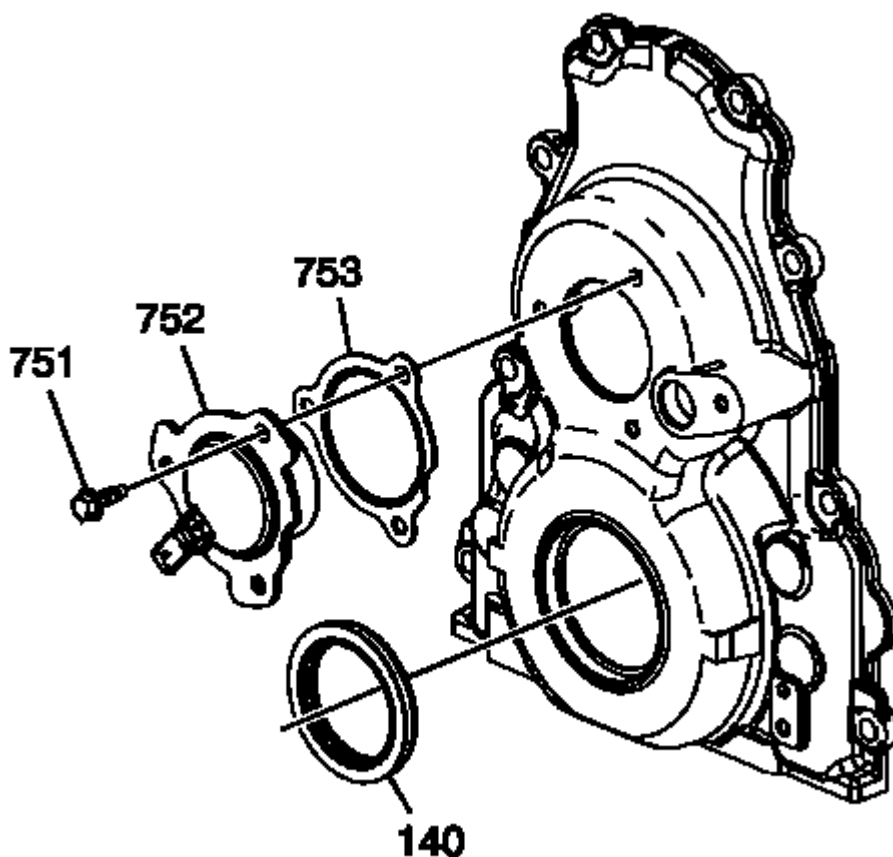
View Of CMP Actuator Magnet, Bolts, Gasket & Oil Seal
